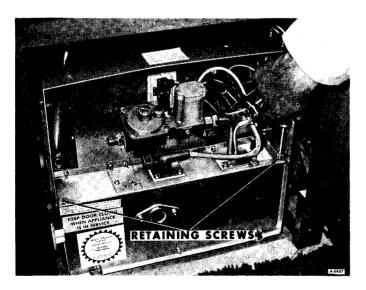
Removing Combustion Chamber Assembly Retaining Screws
